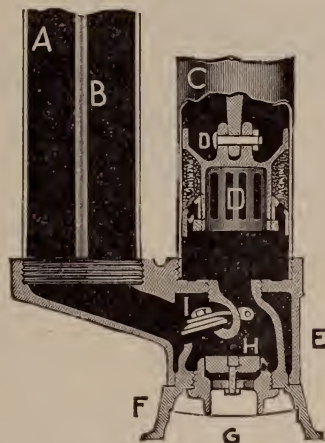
One Arrangement of the Working Parts of a Pump—A, air-chamber; B, discharging tube; C, cylinder; D, plunger, automatic; E, base of pump; F, detachable valve cage; G, screen; H, cylinder valve; I, air-chamber valve.
